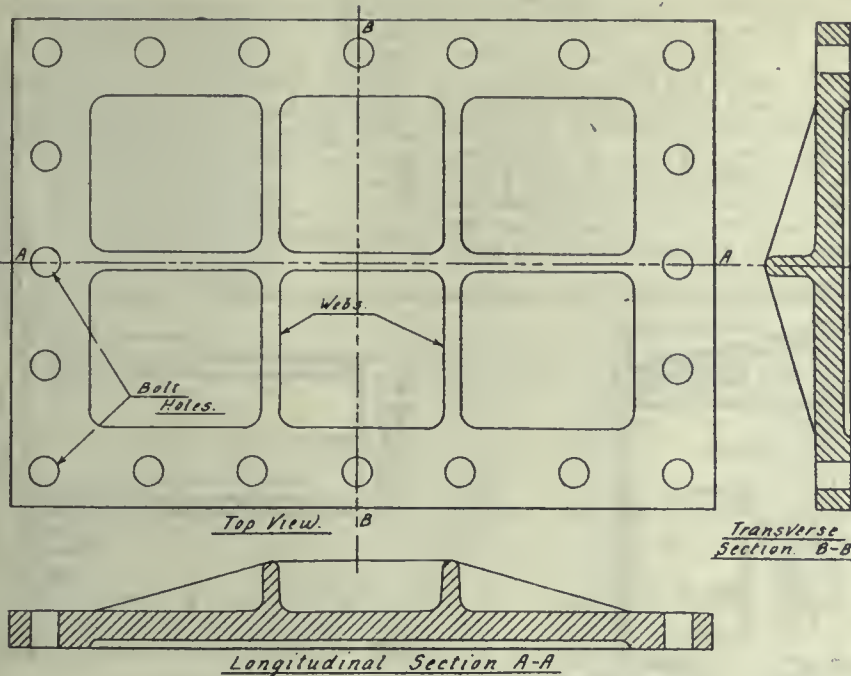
GENERAL VIEW OF WORKING DRAWING.
